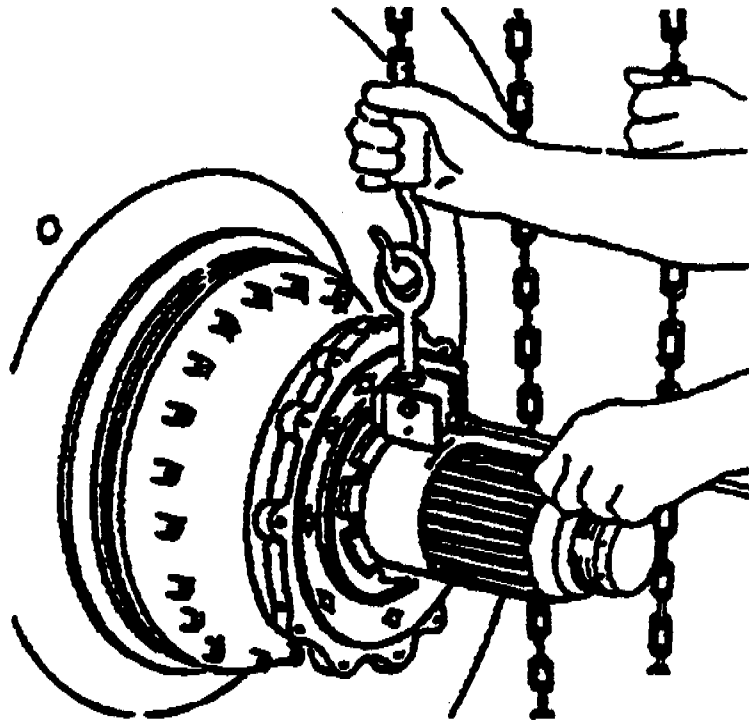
Reduction Gear Assembly and Sun Gearshaft and Attaching Parts (T53-L-15).
